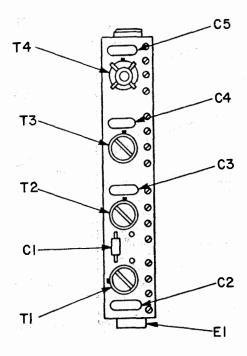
25 MHz Subassembly A2A4A15, Component Locations
